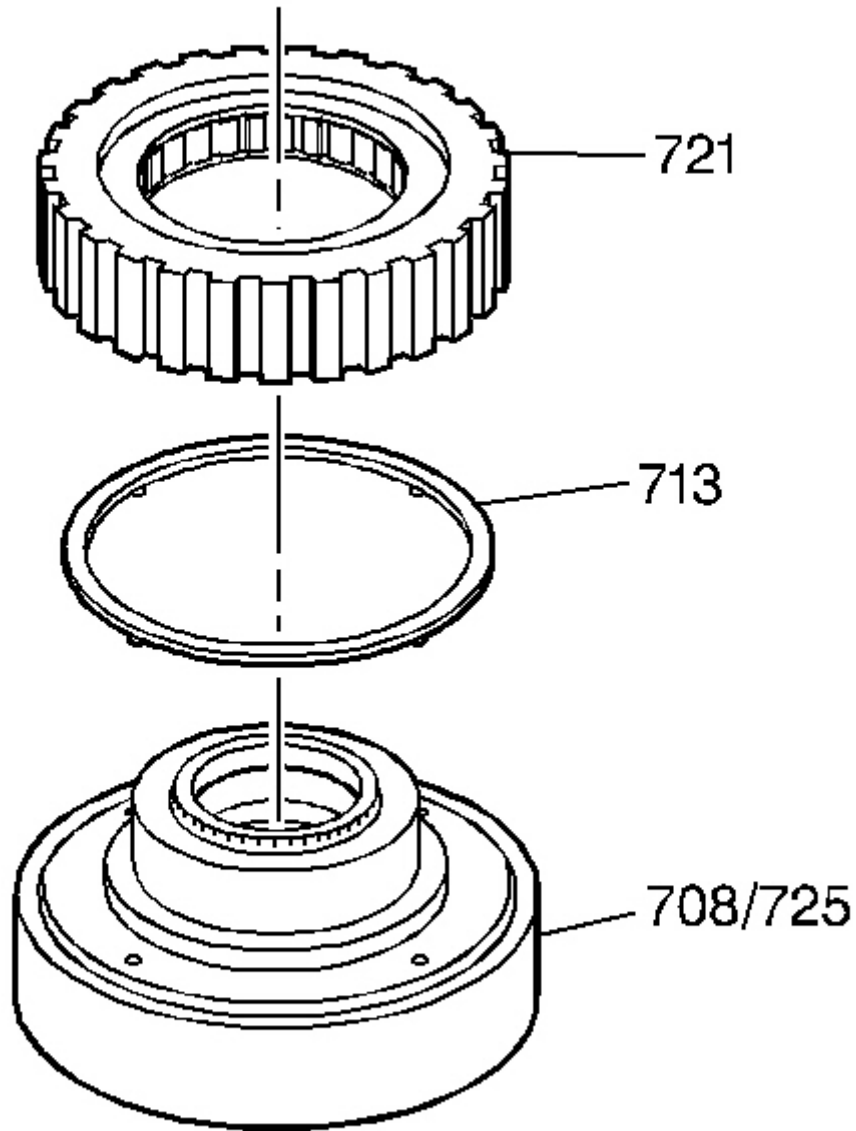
View Of Forward Sprag, Thrust Washer And Input Internal Gear Flange
